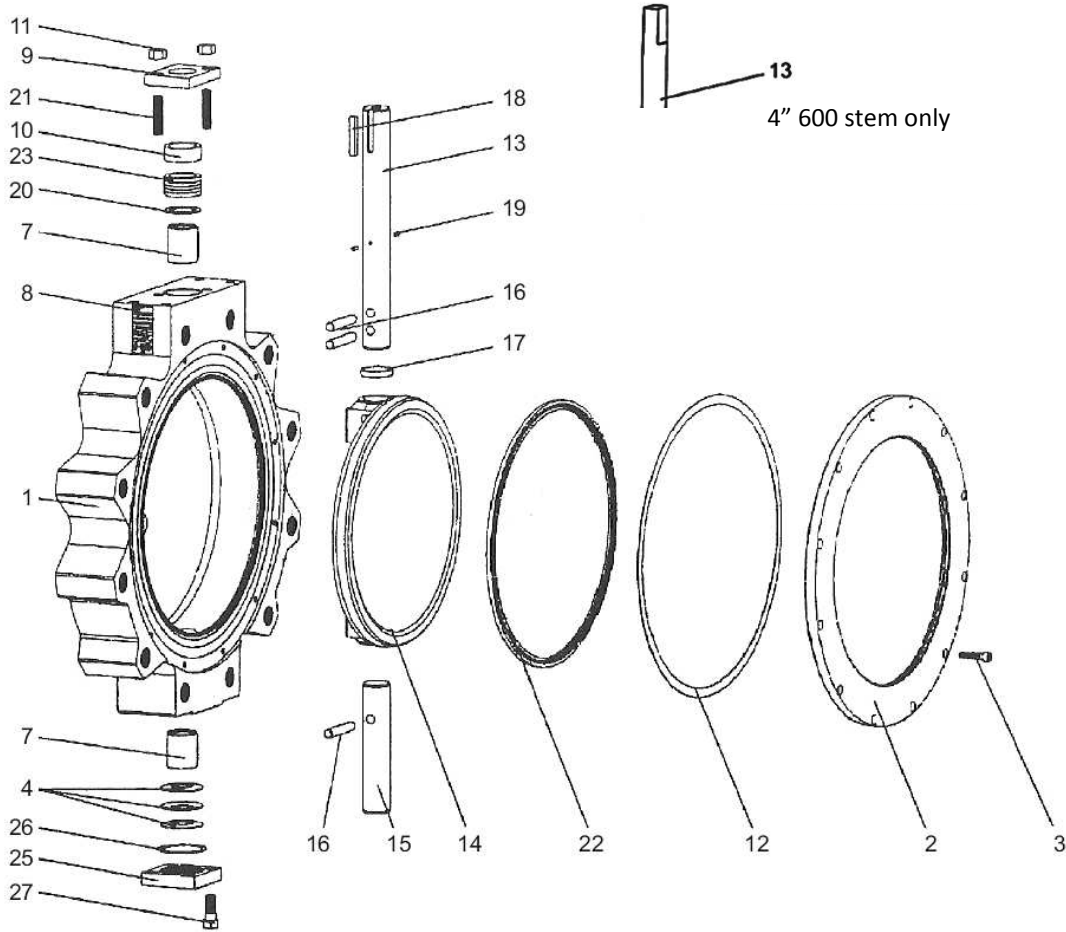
Cameron Valves WKM 4" - 12" Class 600, 30" 150 DynaCentric Butterfly Valve Components Lug Style
